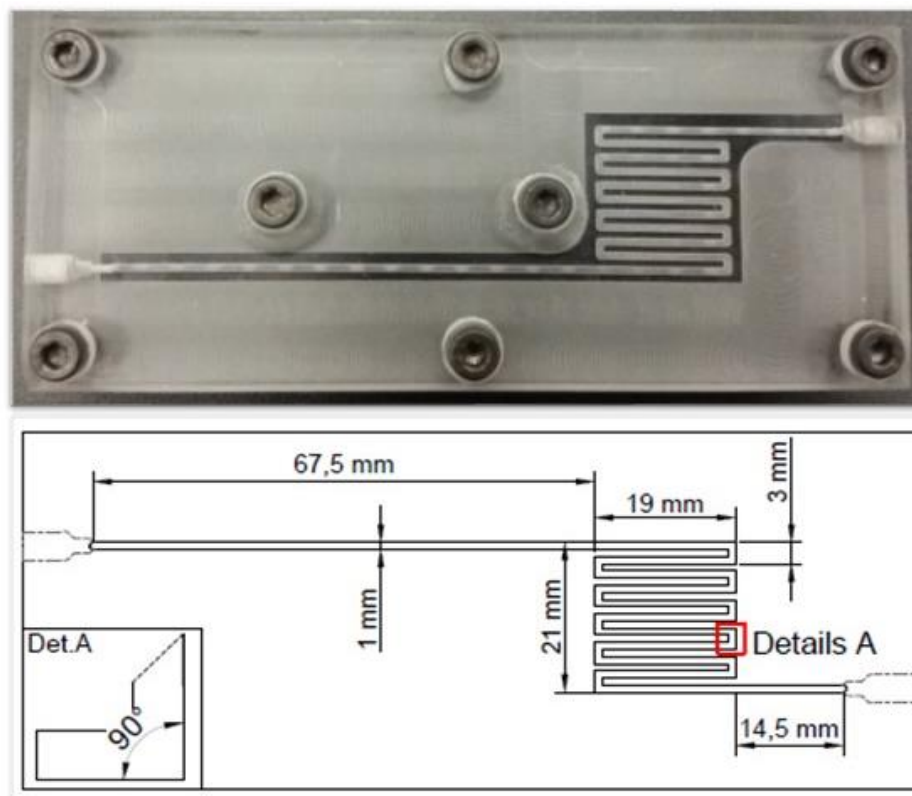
Top view and CAD drawing of the standard serpentine cell.
